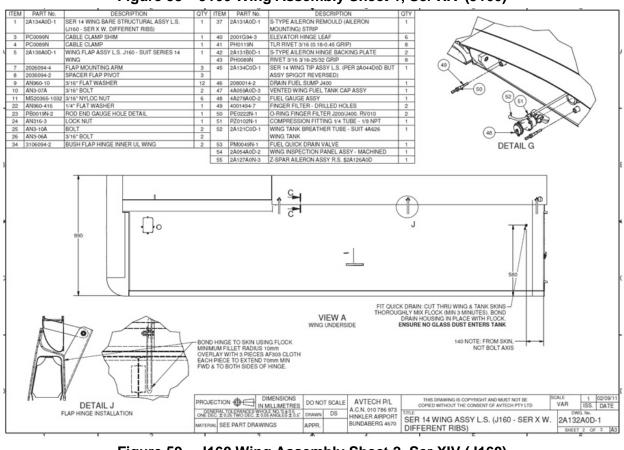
J160 Wing Assembly Sheet 2, Ser XIV (J160)
